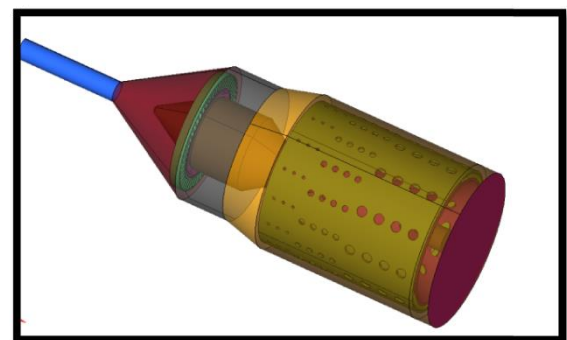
CAD Detail of Micro Gas Turbine Combustor
